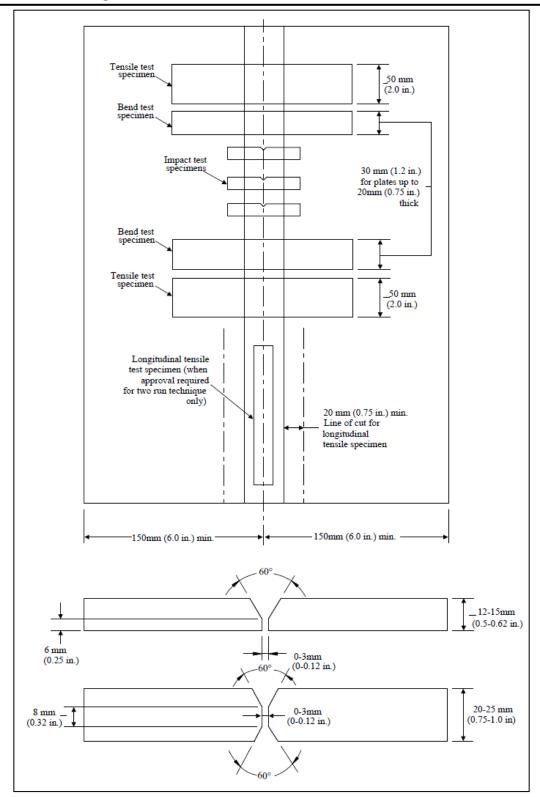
Butt-Weld Test Assembly for Gas-Metal Arc welding - Two-run Technique
